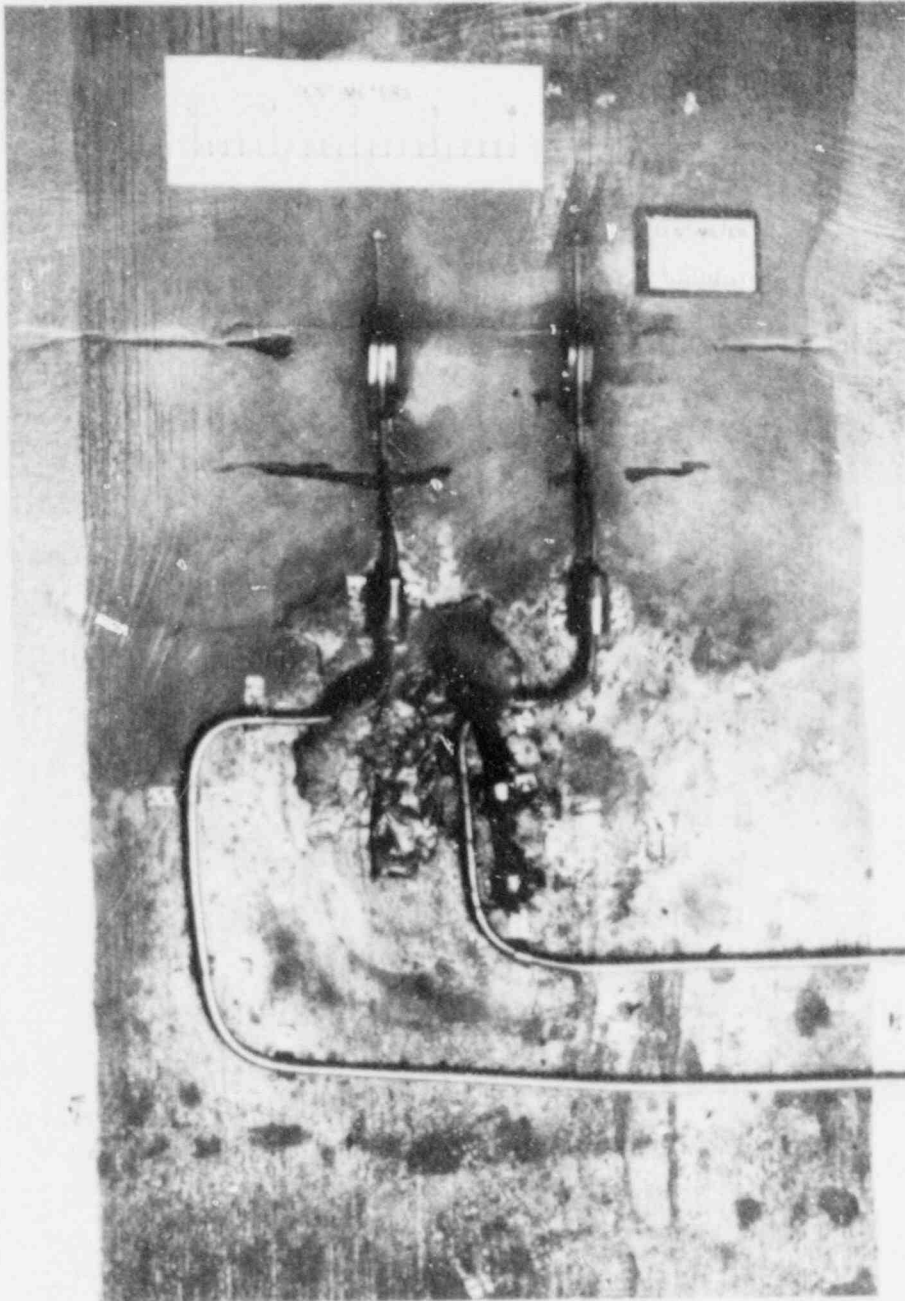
Surface crack in HAZ of EB weld of plate CP-15 after second pop-in (top center), extending as dimples into cladding on either side. Crater on left of crack was formed during EB welding, not during testing.
